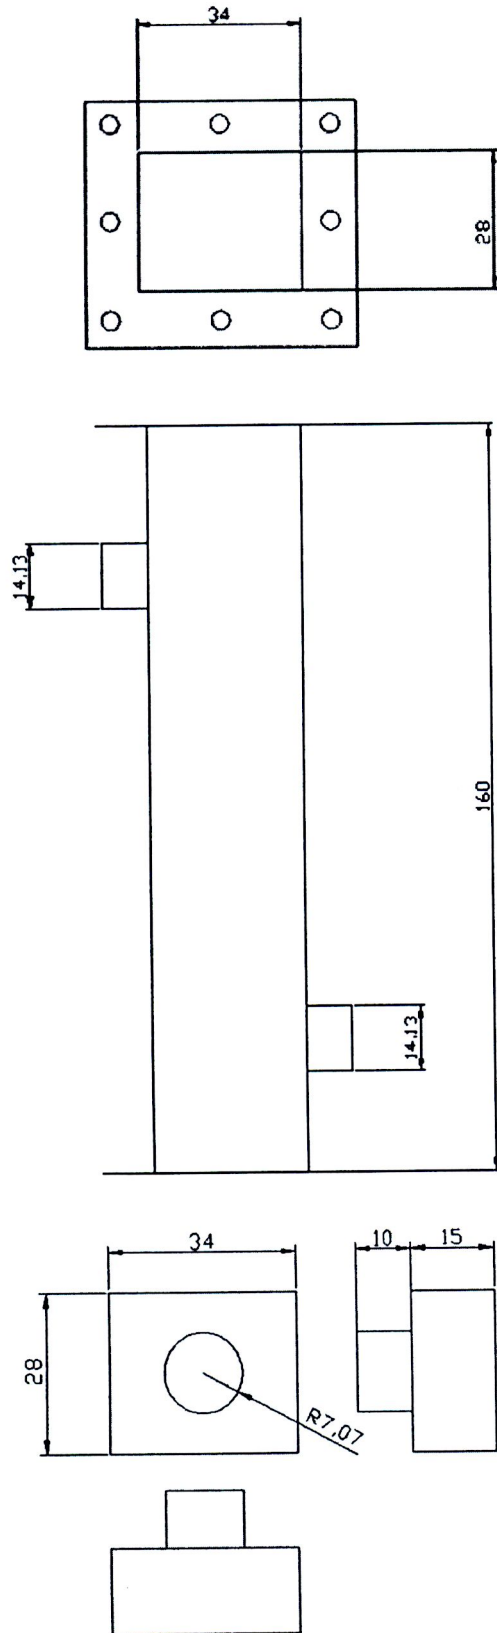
The drawing of the designed shell and tube heat exchanger (unit:cm)
